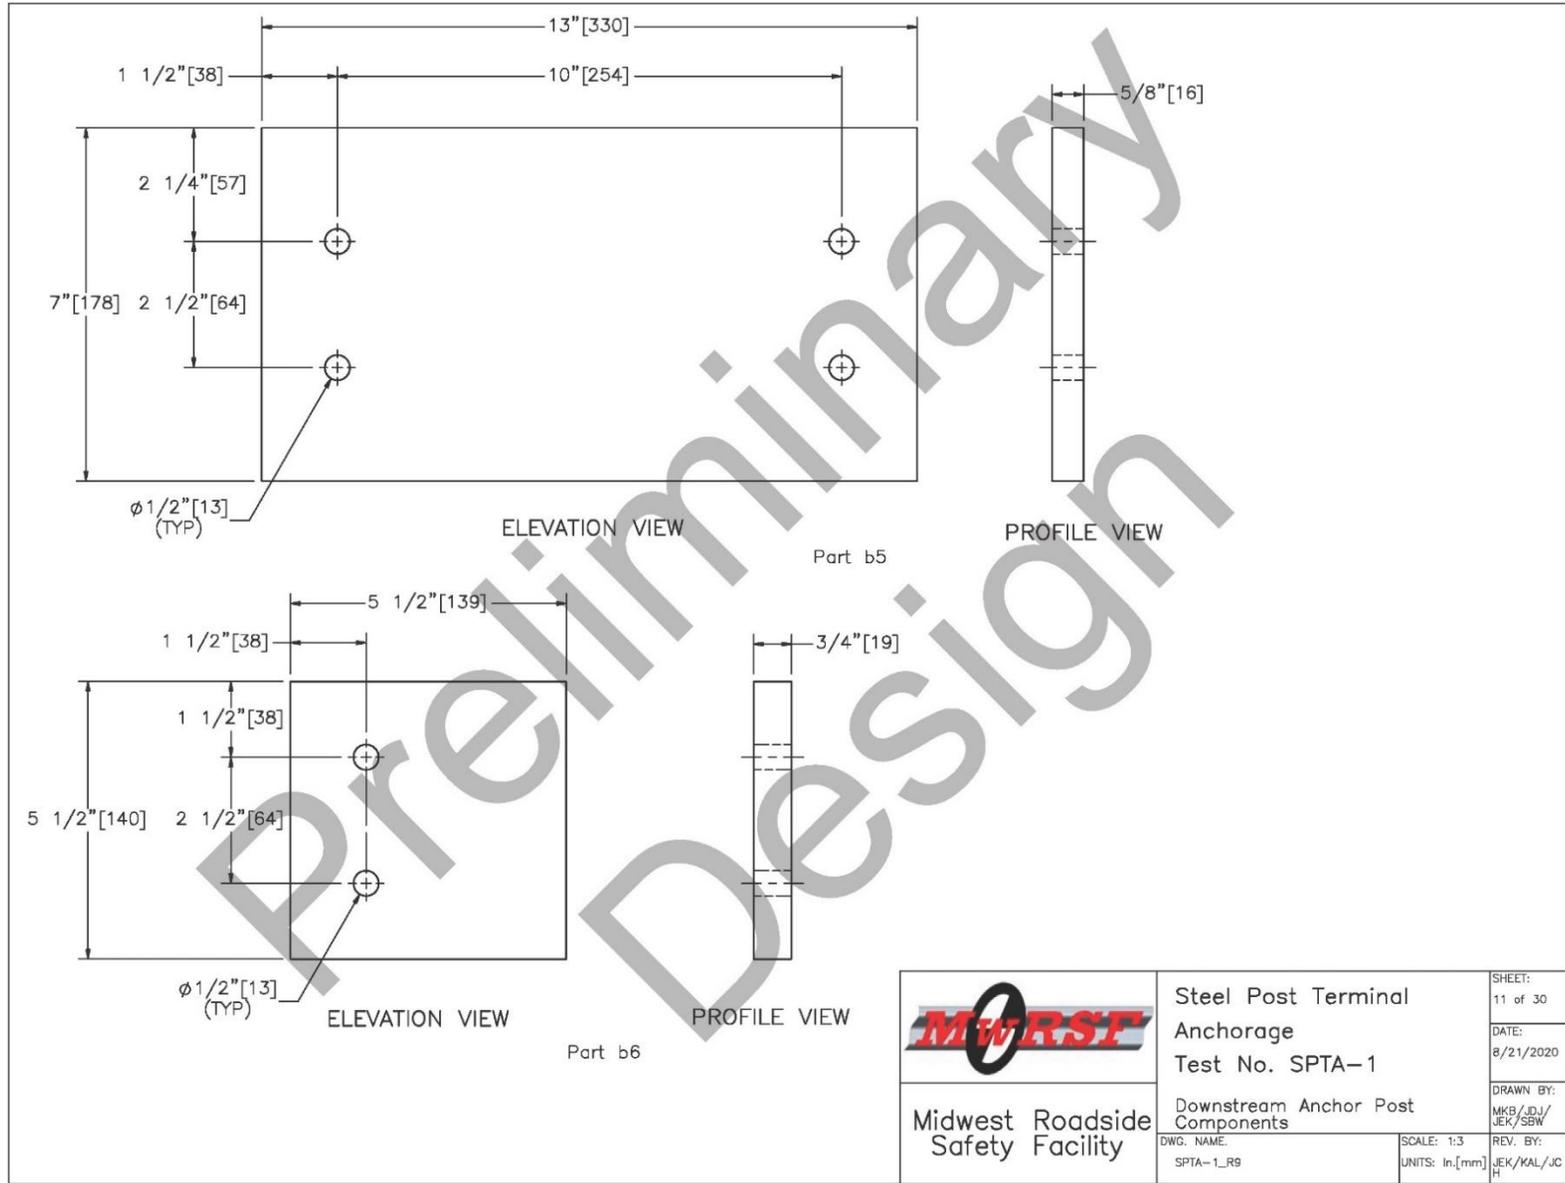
Downstream Anchor Post Components, Test No. SPTA-1
